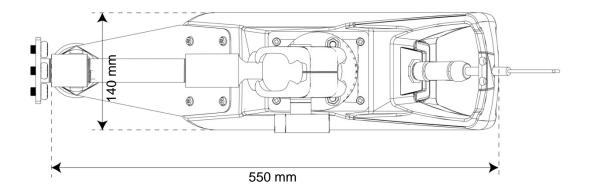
RAVEN-EYE® sensor dimensions top view with level sensor as installed
